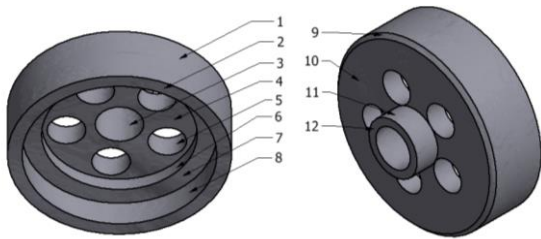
Surfaces of the Anti-Reverse Valve Seat Piece
